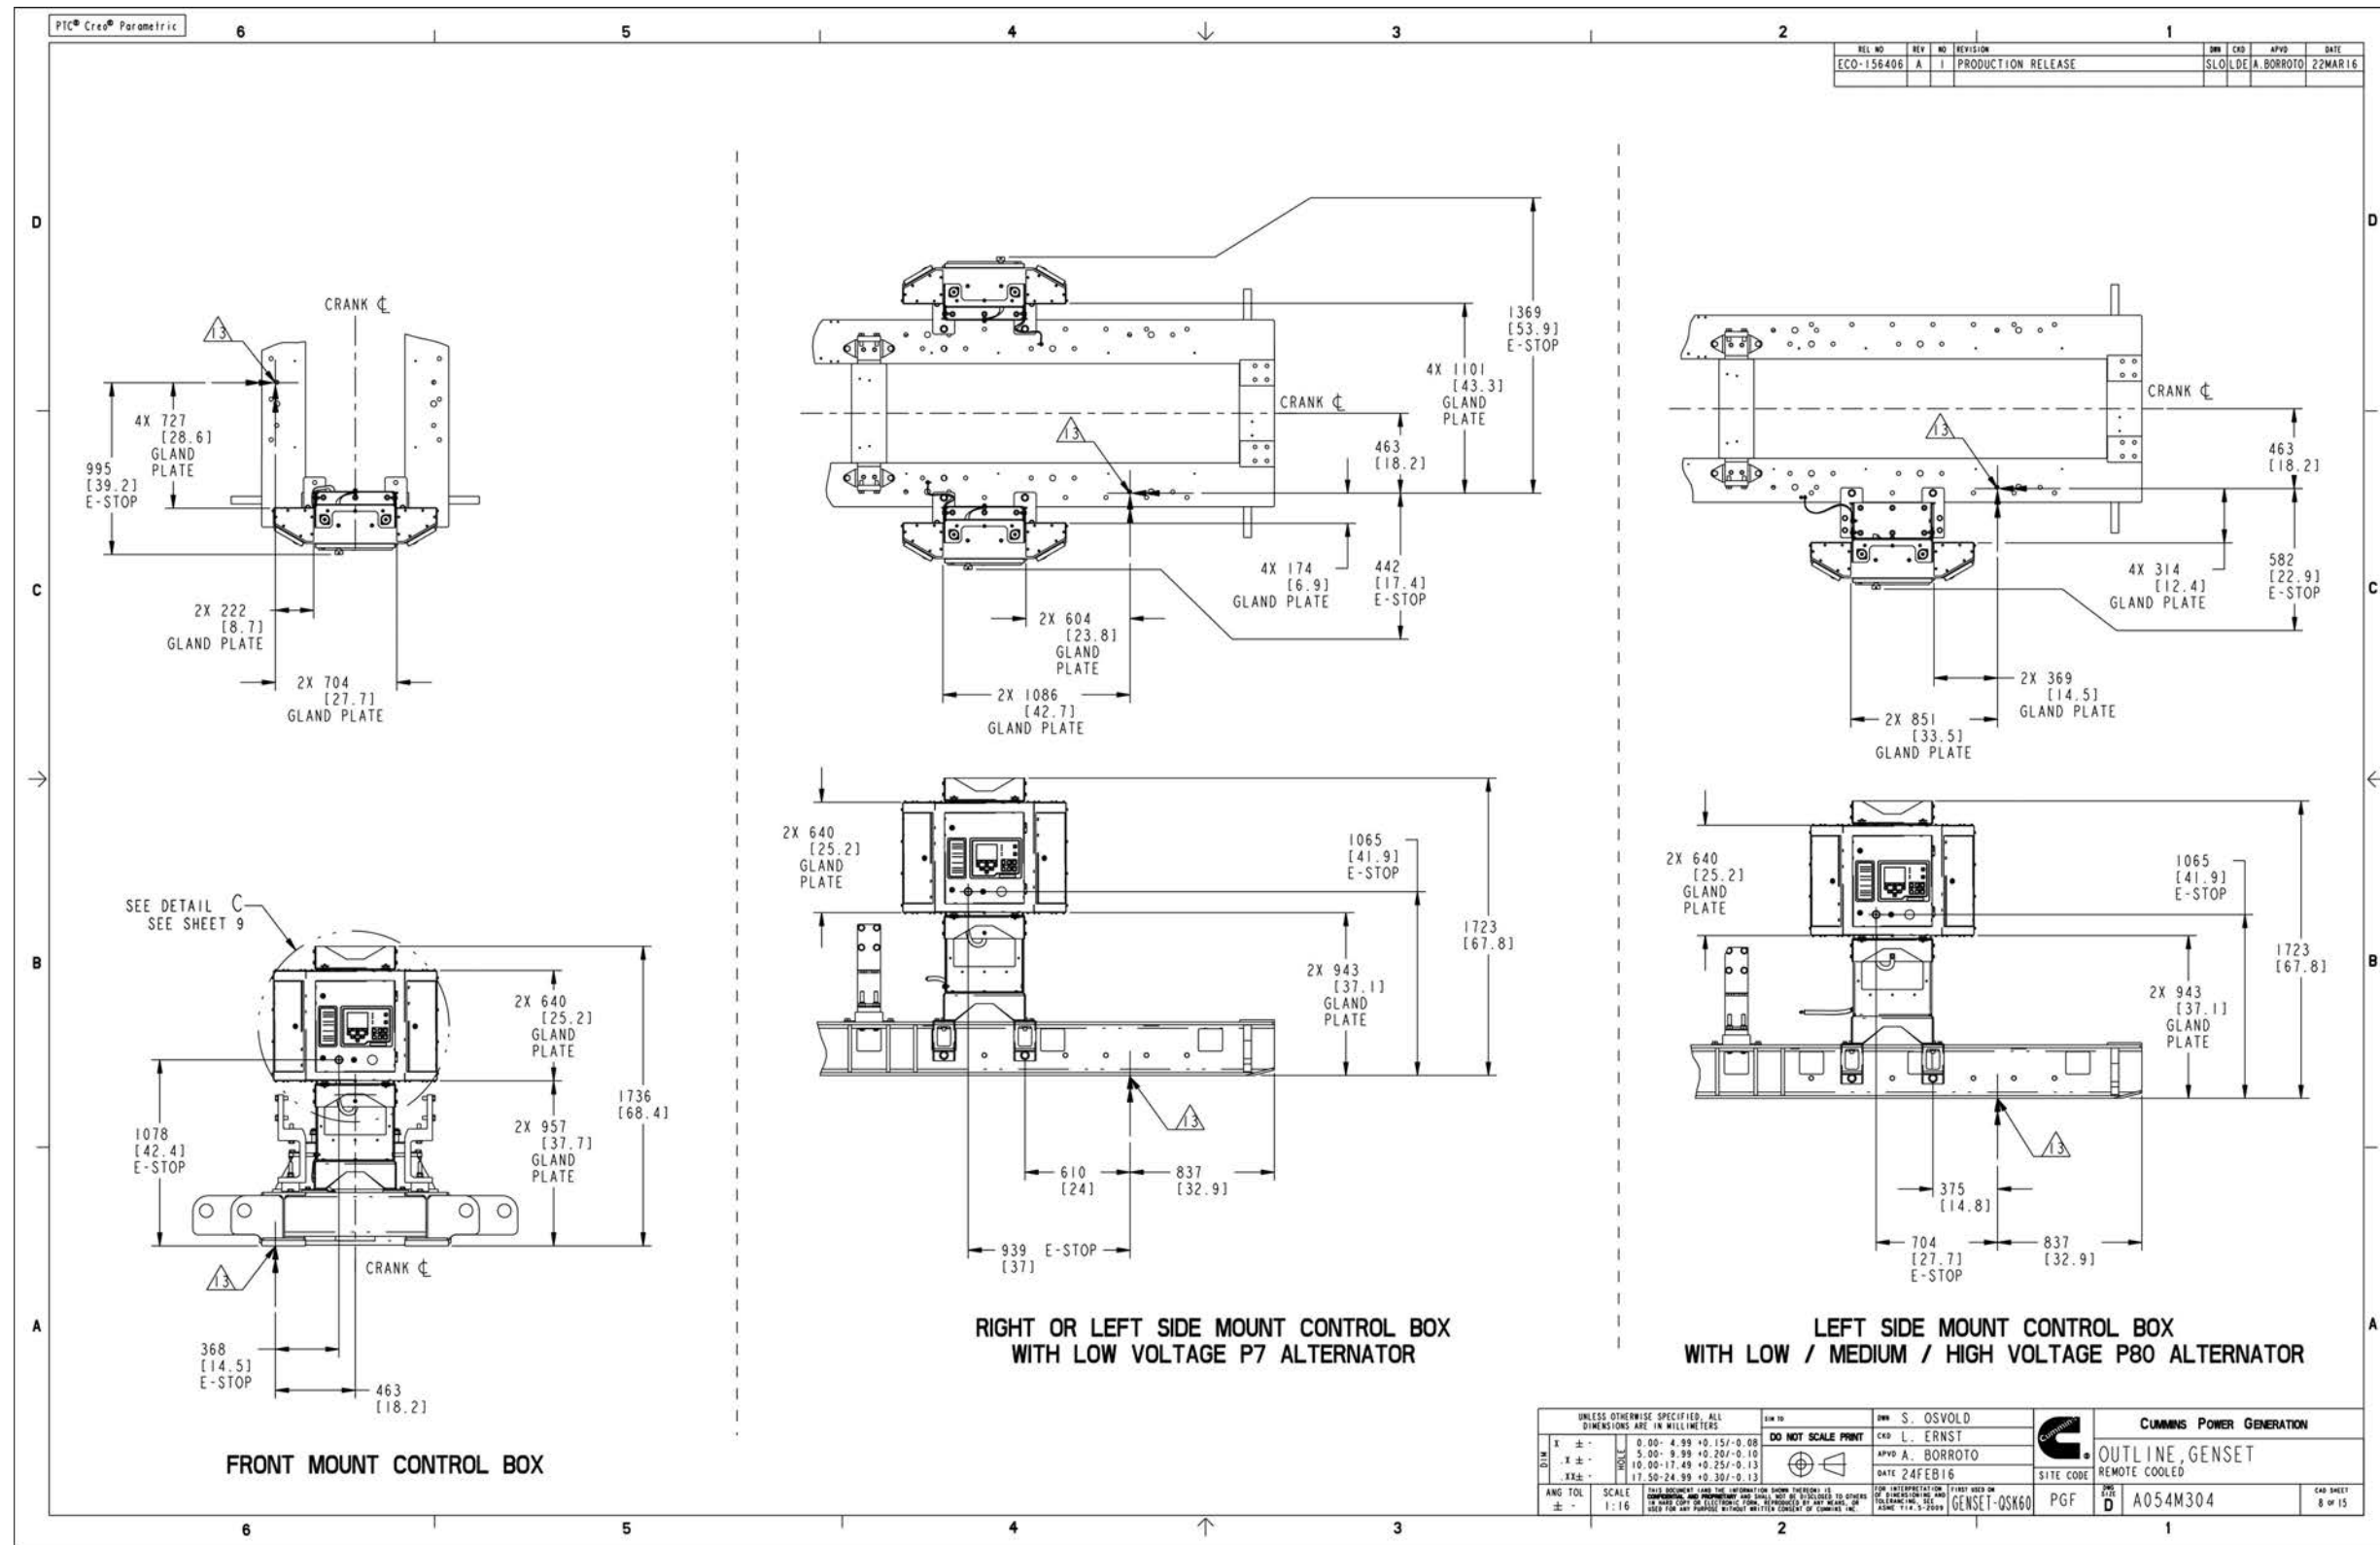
GENERATOR SET WITH REMOTE COOLING OUTLINE DRAWING (SHEET 8)
